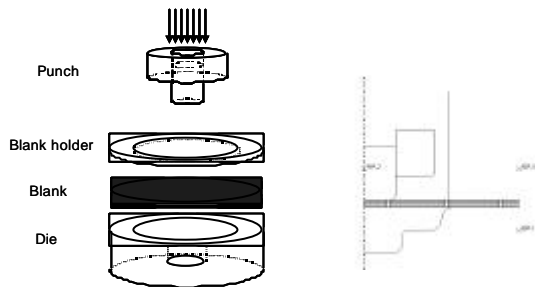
Schematic and Finite Element Mesh of Multi-head Punch Deep Drawing
